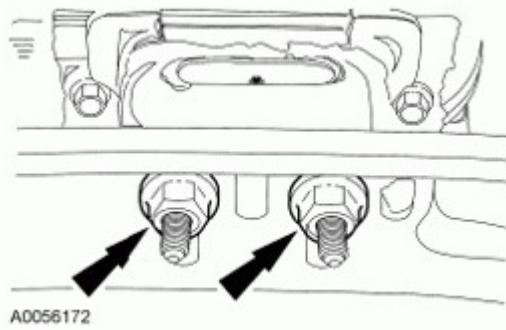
Locating Rear Transmission Insulator And Retainer Nuts
